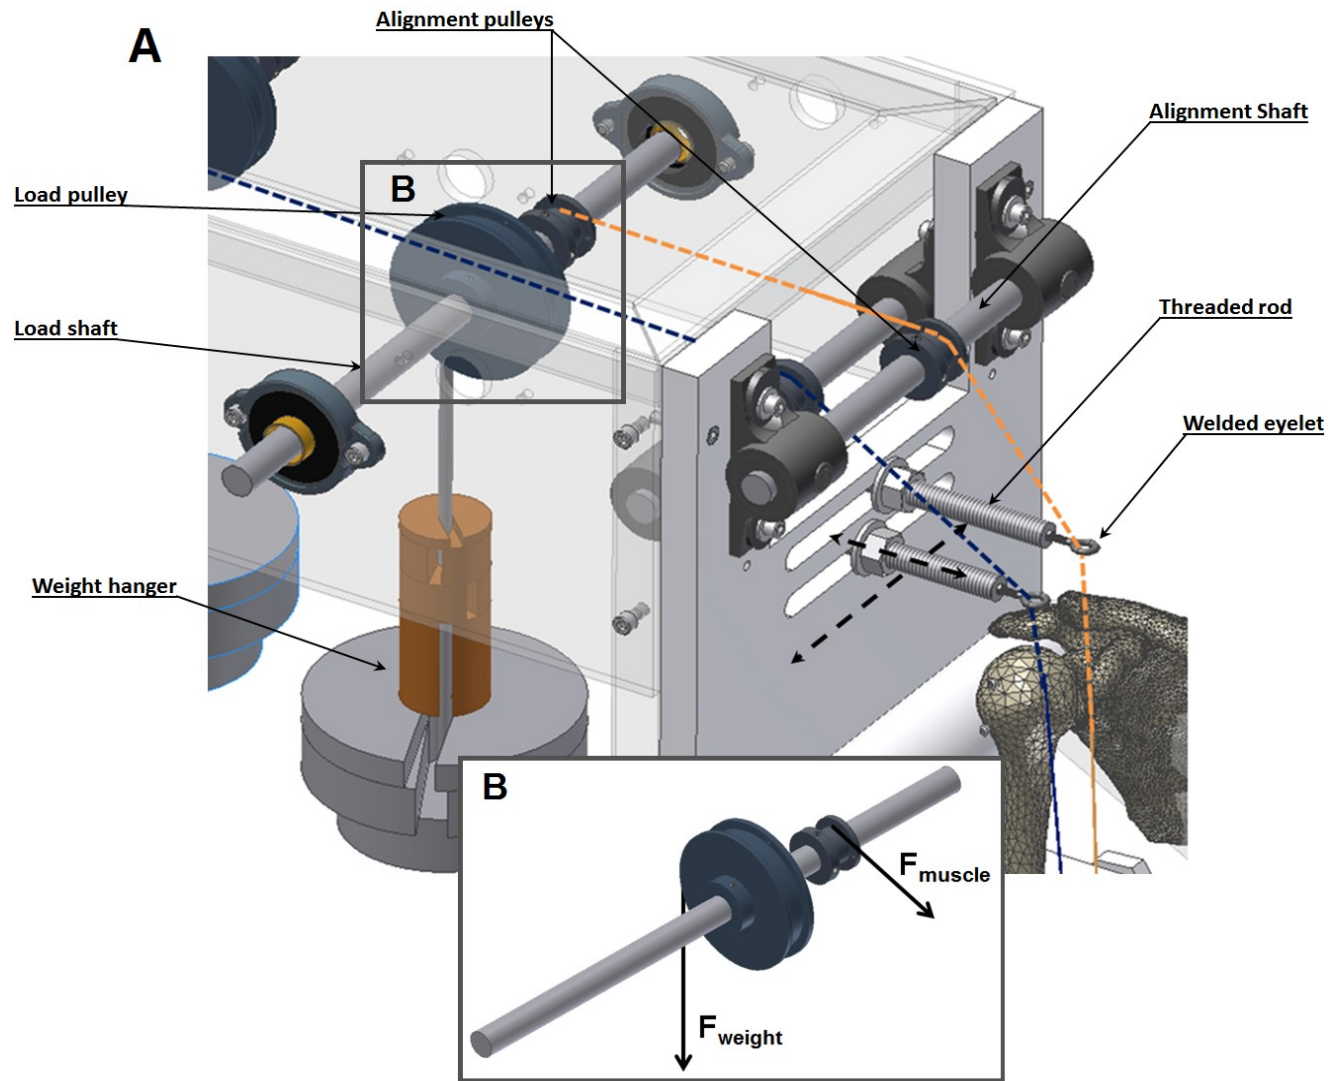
A – Cable routing and muscle loading assembly. B – Load shaft assembly.
